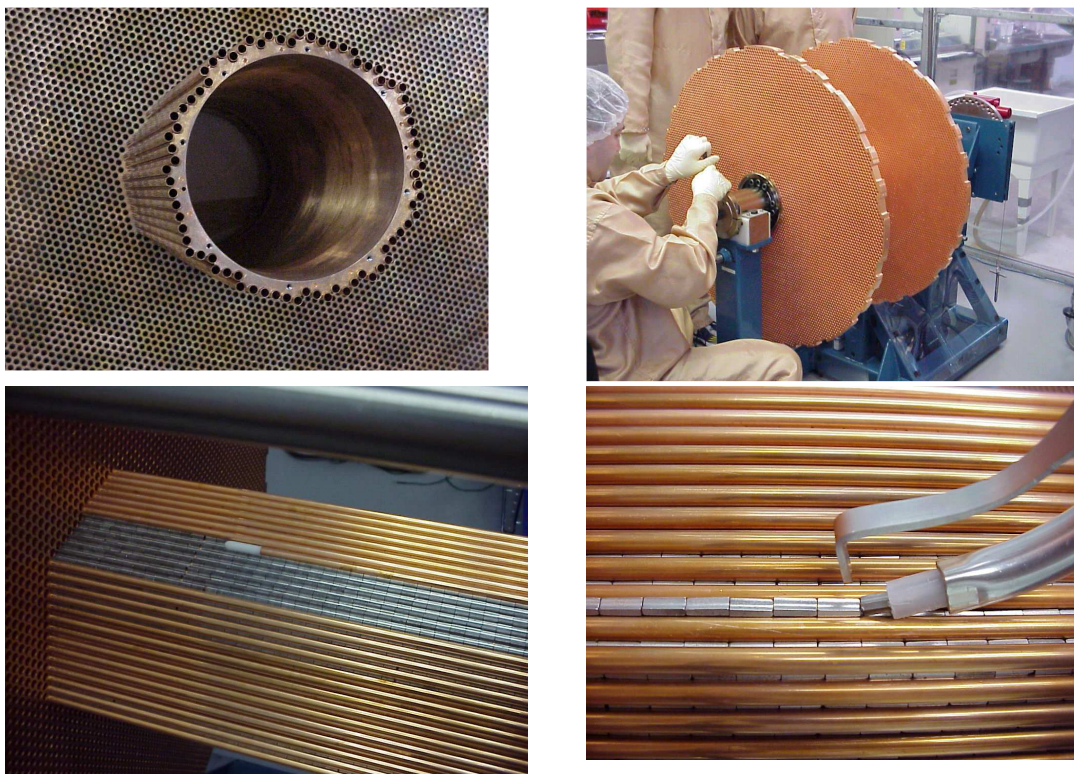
Construction of hadronic FCal modules. Top-left: Inner cladding with one layer of tubes and one end plate. Top-right: Endplates mounted and aligned on the module assembly tooling. Bottom left: matrix stacking – insertion of tube over row of slugs. Bottom right: laying a row of slugs using the slug feeding tooling.
